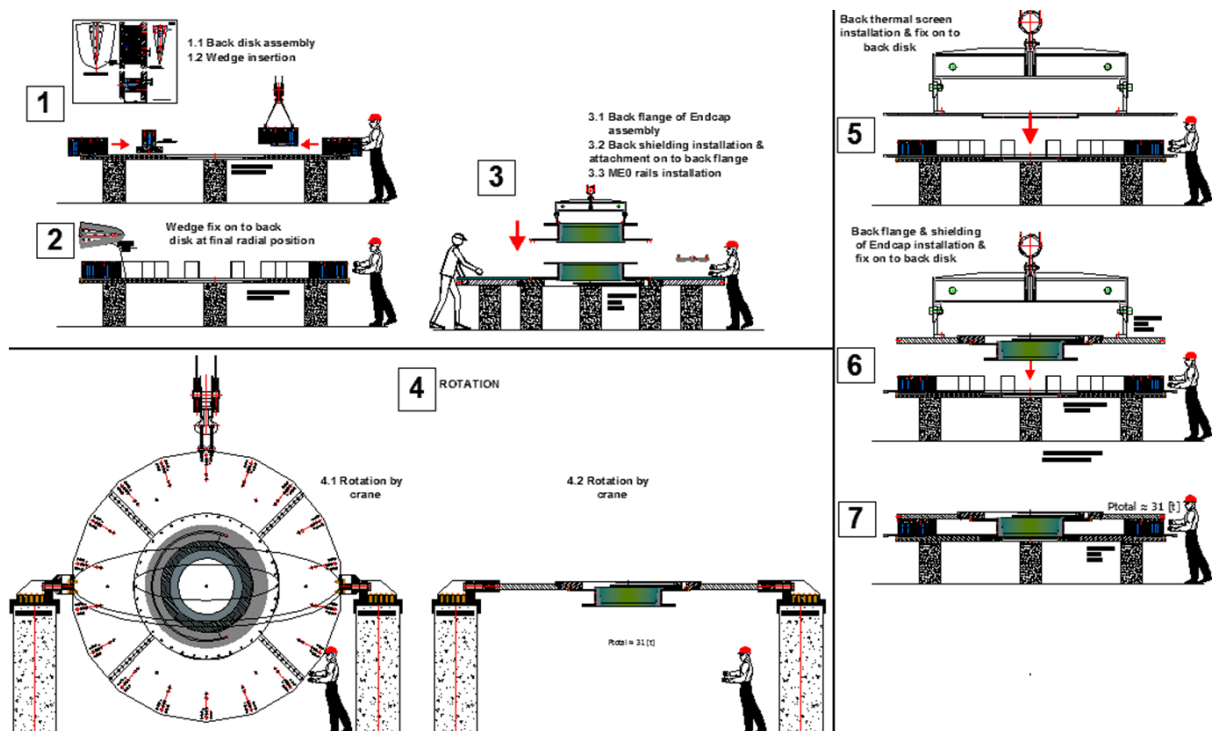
Assembly steps and tooling for the assembly of the back disk with the back flange and the sliding wedge system.
